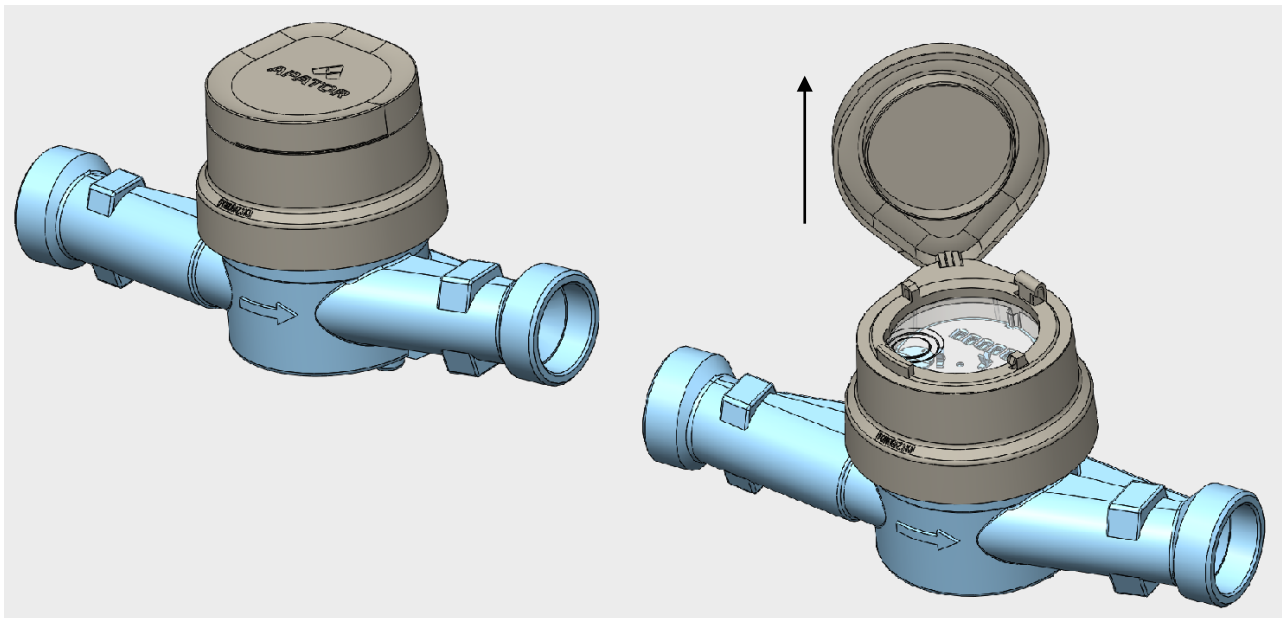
A view of the JS Master+ water meter in the IP68 version.
